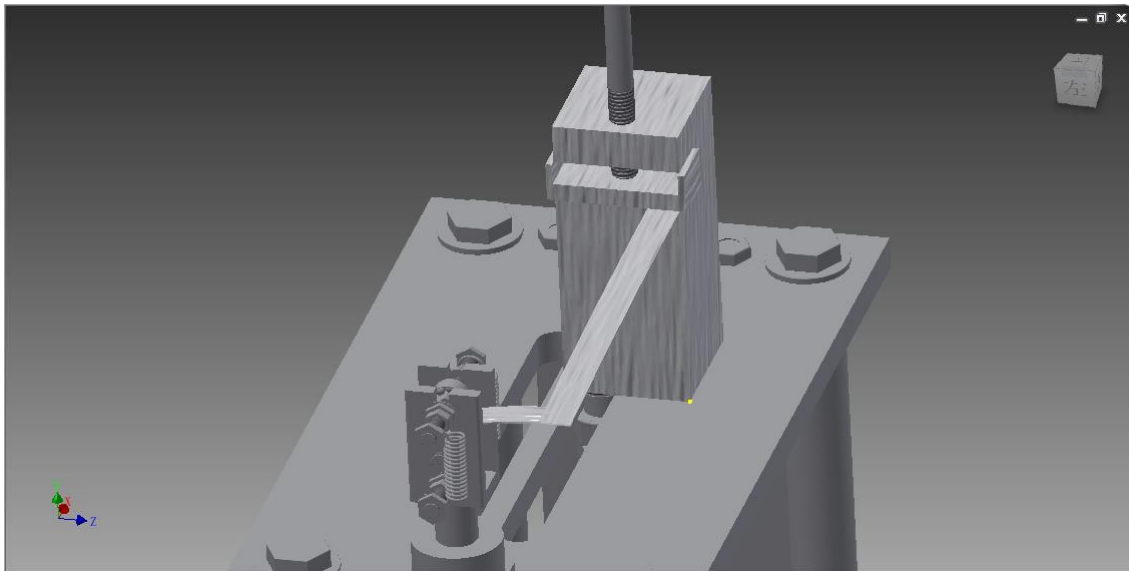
3D “Inventor” image of the machine for combining loading by bending and torsion.
